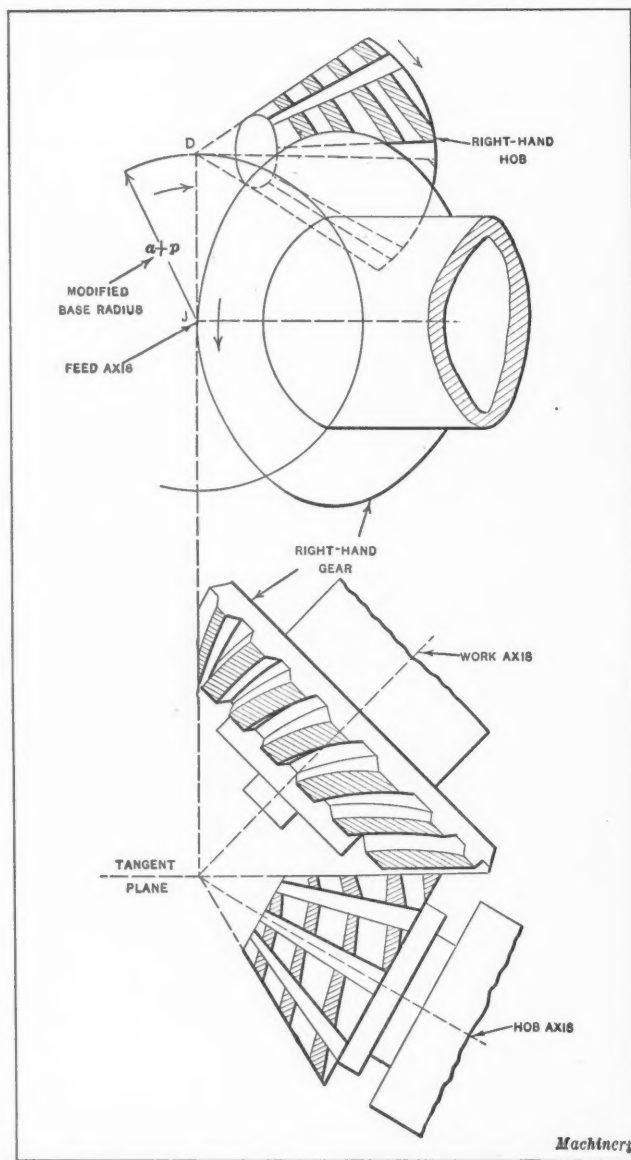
Right-hand Hob in Position for generating a Right-hand Miter Gear
